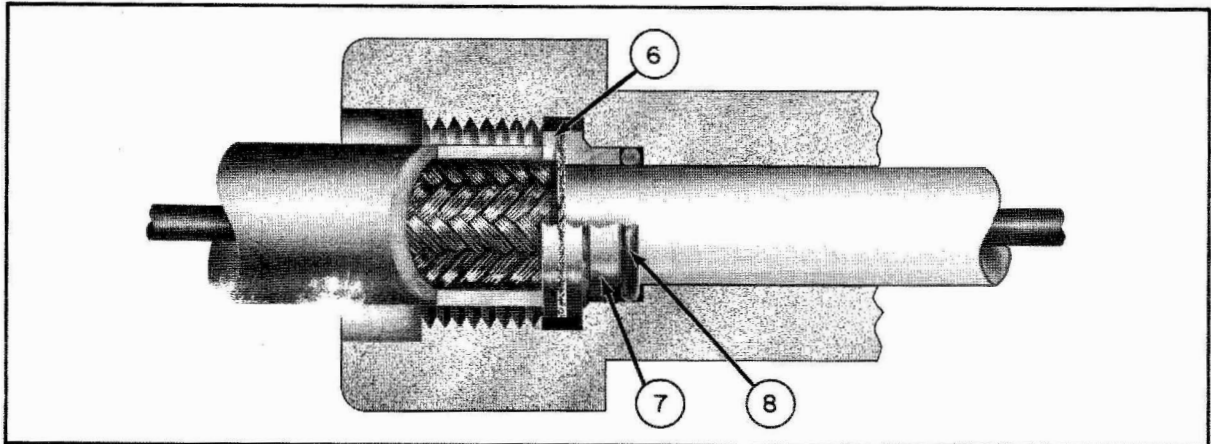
Proper Seating of Cable In Pressureproof Fitting
